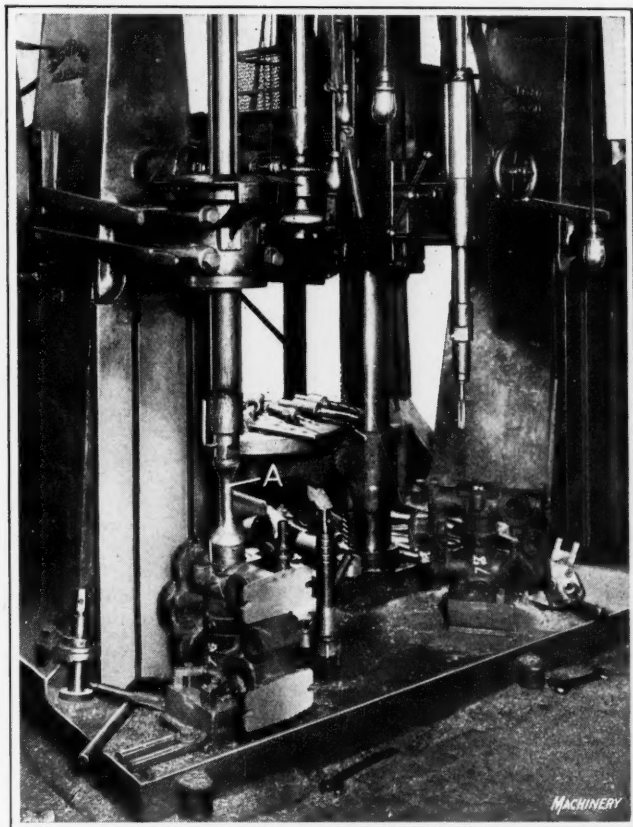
Drilling Machine on which the Cylinder is bored and the Cylinder Head Bolting Surface machined
